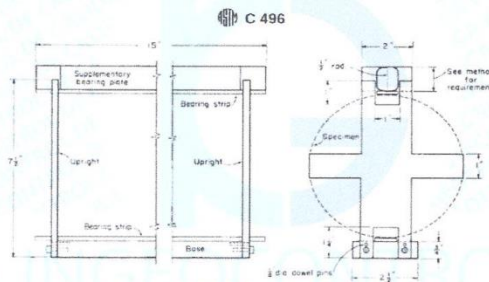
Detailed Plans for a Suitable Aligning Jig
